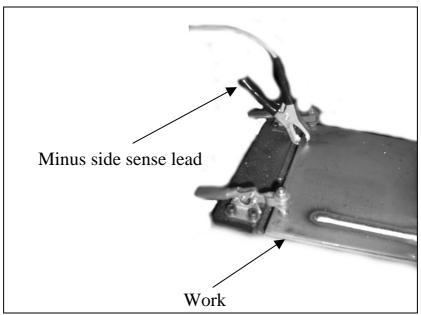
(e) Connection of welding power supply Power Wave R350 and STT module
